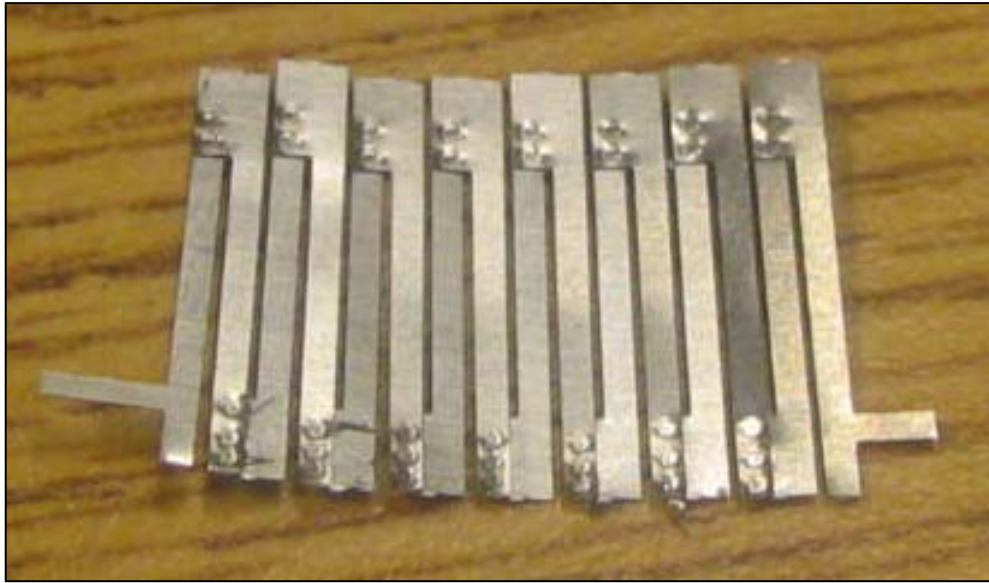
One strip of 15 couples after spot welding (practice parts).
